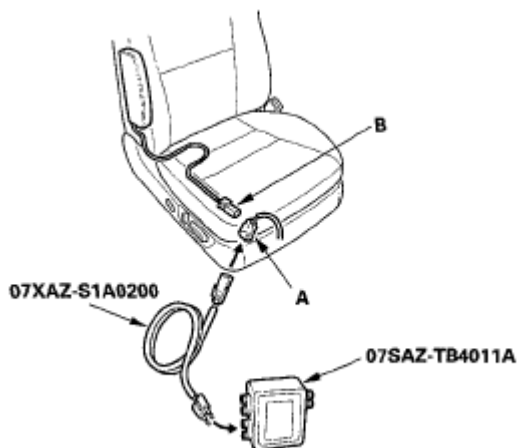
Identifying Right Side Wire Harness 2P Connector And Front Passenger's Side Airbag
